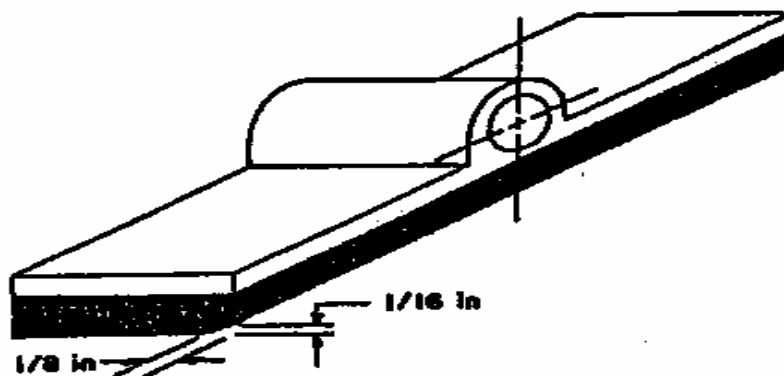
Slider Assembly Illustrating the Maximum Wear on Striking Edge
